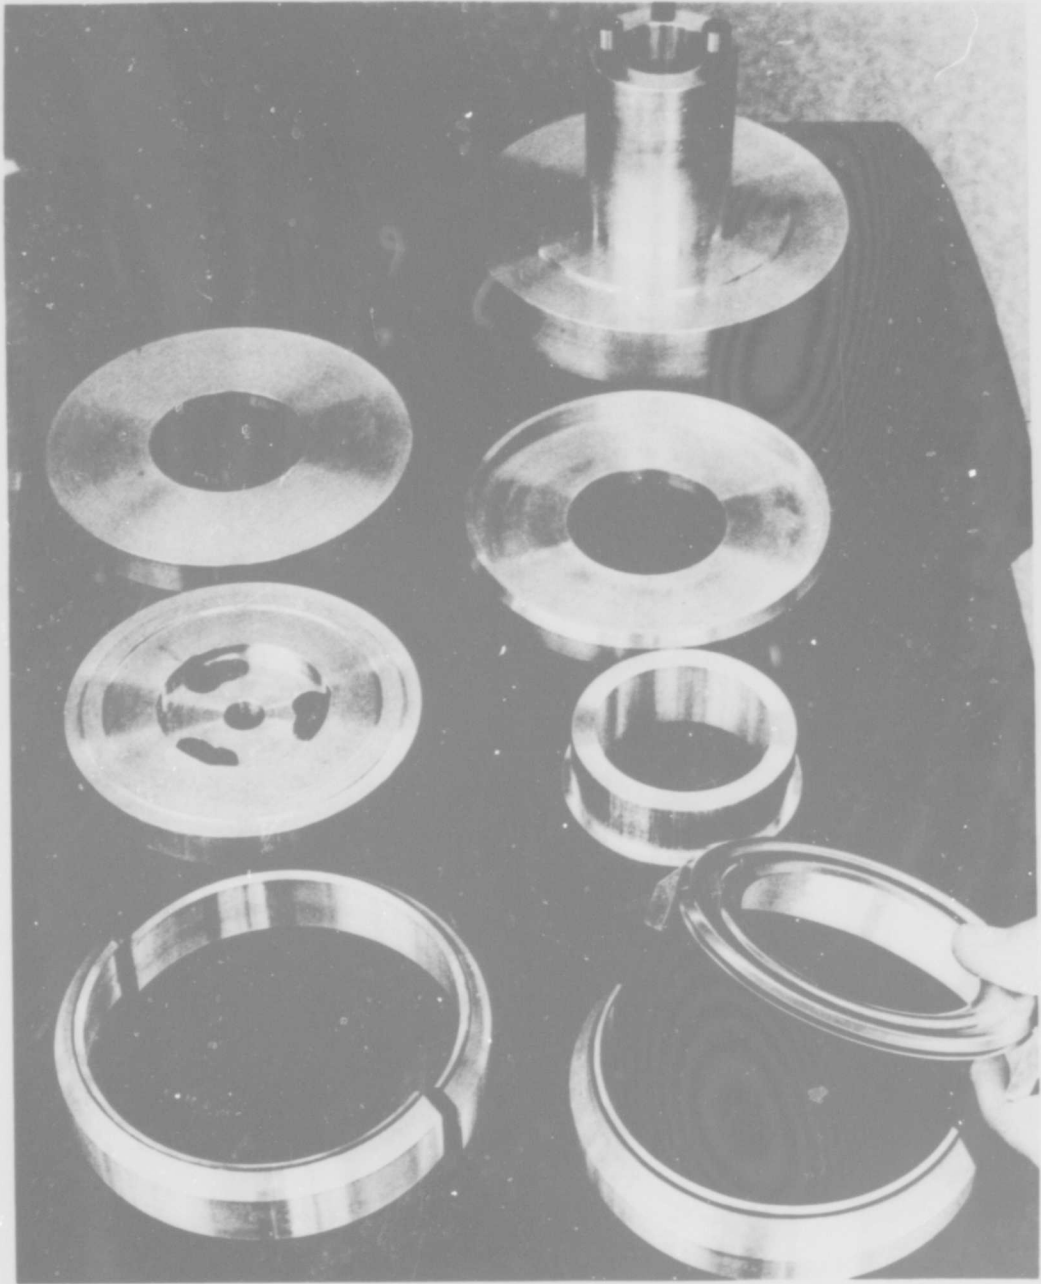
COMPLETE DISASSEMBLY OF THE OUTER-CONVOLUTION-WELD TOOLING
